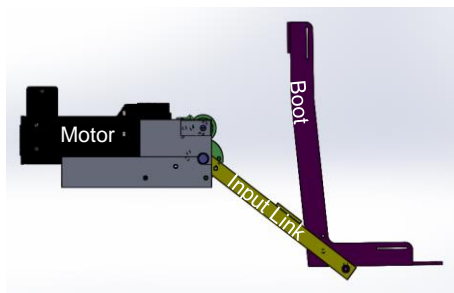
Side view of mechanism highlighting the input link (yellow). The actuator would apply a torque to the input link.
